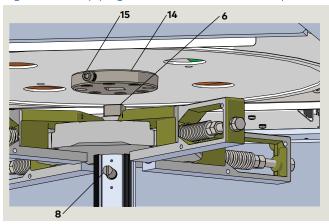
Top plug extended into drive adapter, cross pin holes aligned
